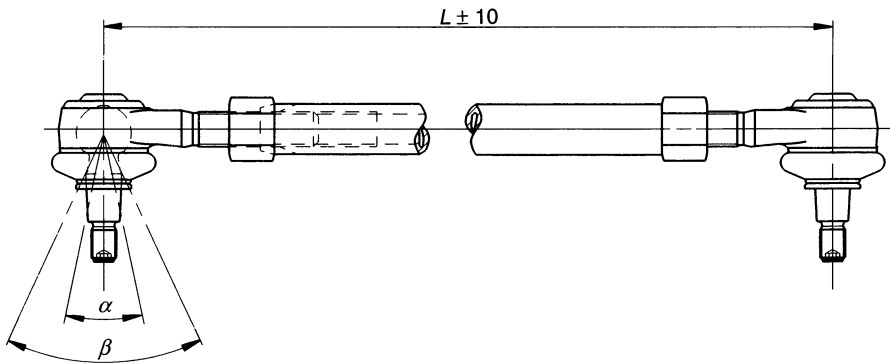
Configuration of an adjustable tie rod with pre-lubricated joints and buckling-resistant central tube, the interior of which has a right-hand thread on one side and a left-hand thread on the other. It can usually be continuously adjusted by ± 10 mm. When toe-in has been set, the length on the right and left tie-rod may differ, resulting in unequal steering inputs and different size turning circles; for this reason, the central tube should be turned the same amount on the left and right wheel.
